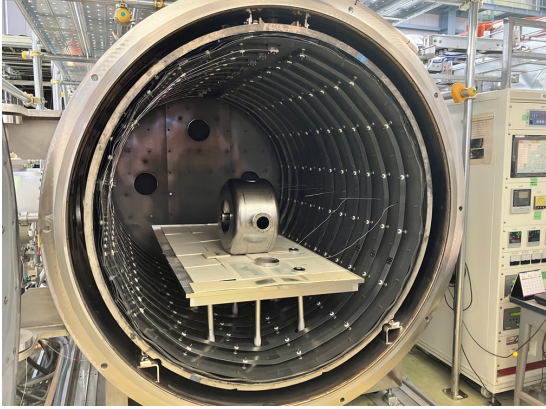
Prototype spoke cavity installed in the J-PARC vacuum furnace.
